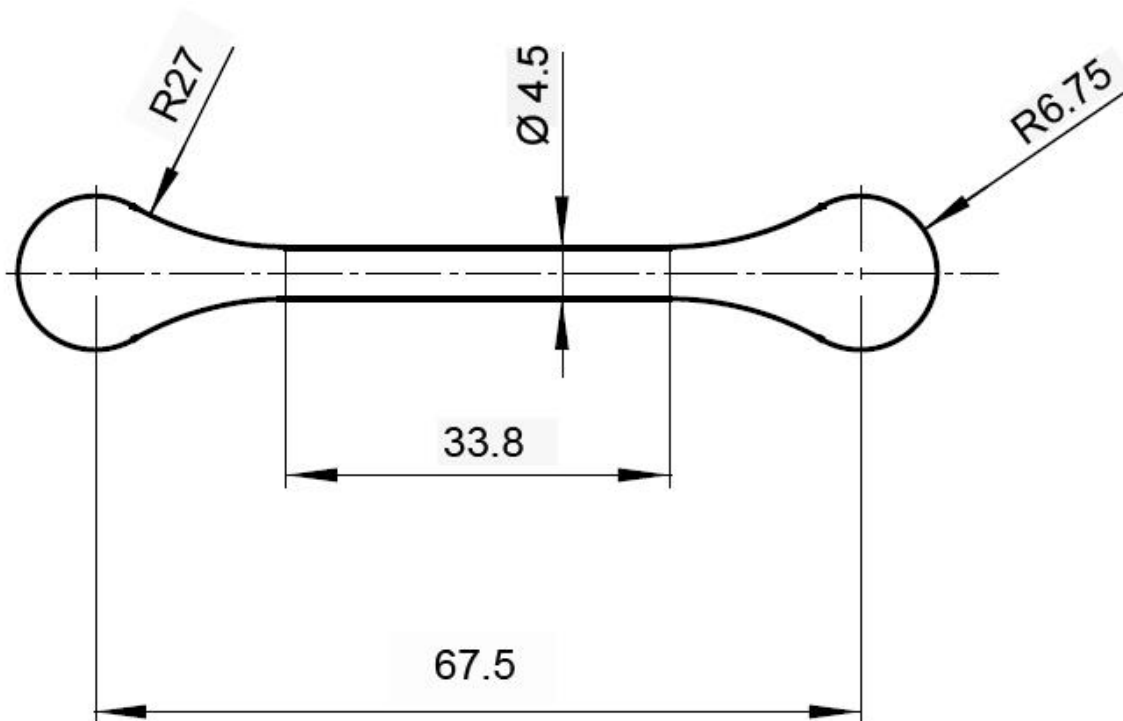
Geometry of "dog-bone" tensile test specimen. Dimensions samples as sintered condition. Units are in millimetres.
